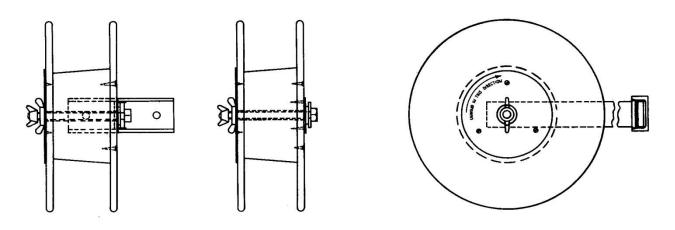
OPEN TYPE CAGE FOR HOLDING M.D.F. CORDS.
